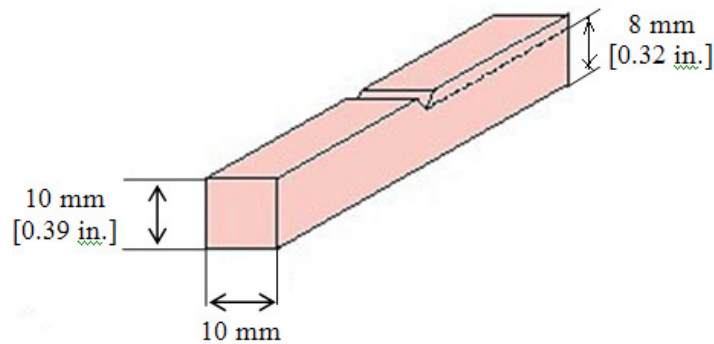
(a)-3 Specimen dimensions in Izod Impact testing
